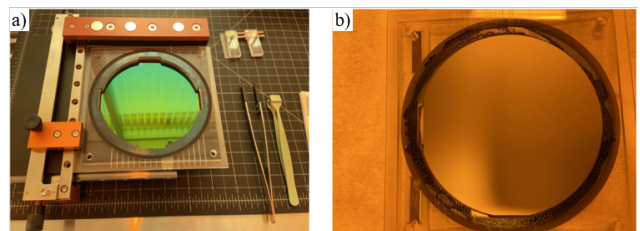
Front view (a) and back view (b) of wafer fixed in the holder.
